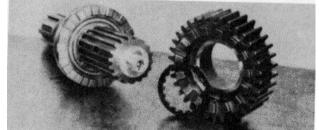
B-24. Removing 2nd Gear and Thrust Washer
